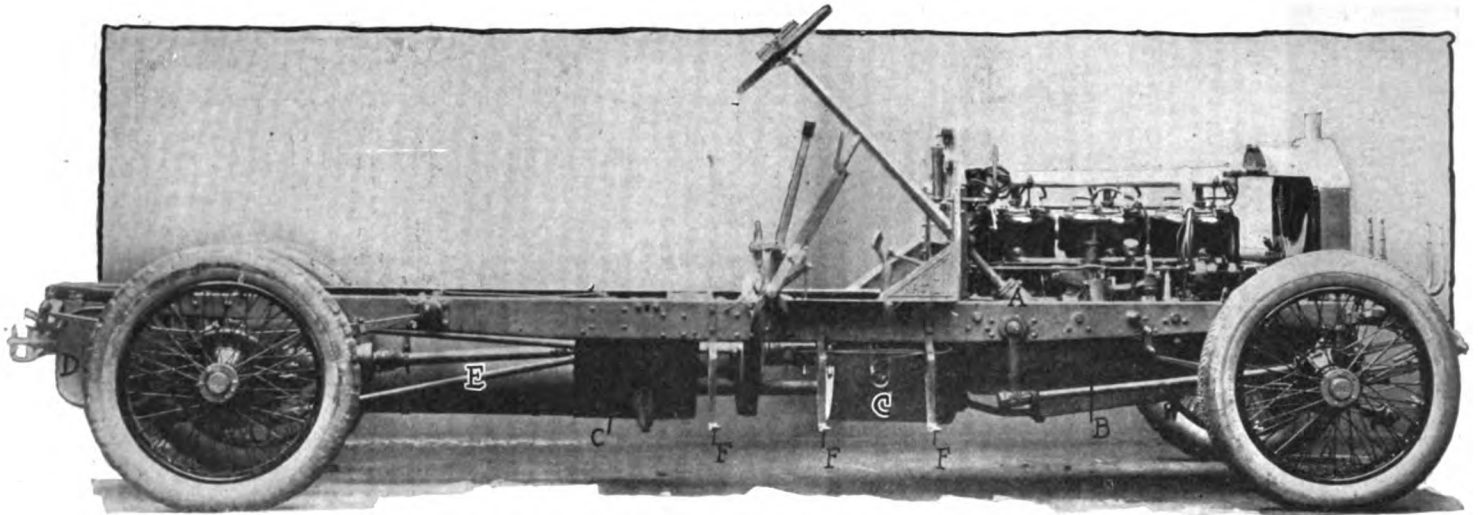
45-horsepower, six-cylinder Napier chassis. A, steering adjustment; B, reach rod; C, oil pans; F, step hangers; E, torque member
